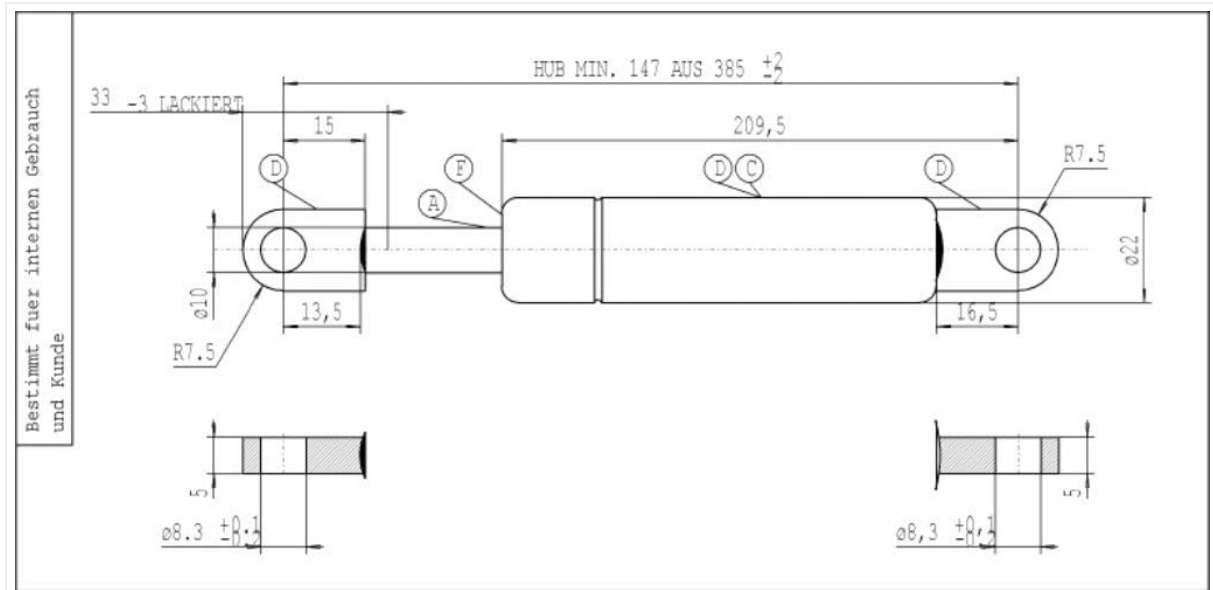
Technical drawing of the Stabilus 084875 Gas Spring, showing key dimensions including overall length (385 mm), stroke (147 mm), and mounting point diameters (10 mm and 22 mm). This diagram is essential for proper installation and fitment.
